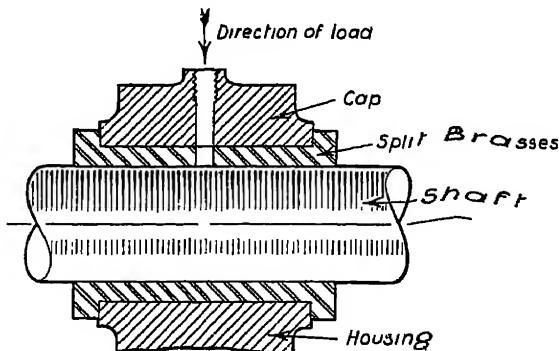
SECTIONAL DRAWING OF JOURNAL BEARING
